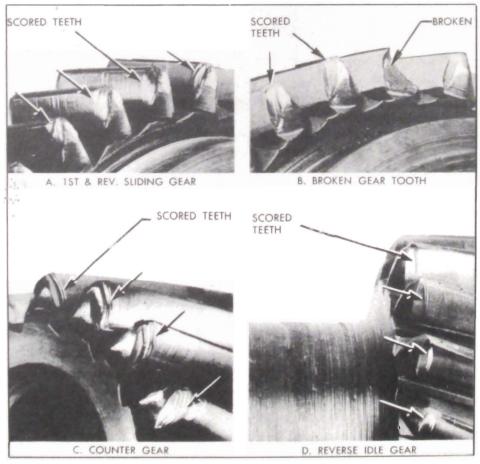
Gear Teeth Damaged by Improper Gear Shifting
